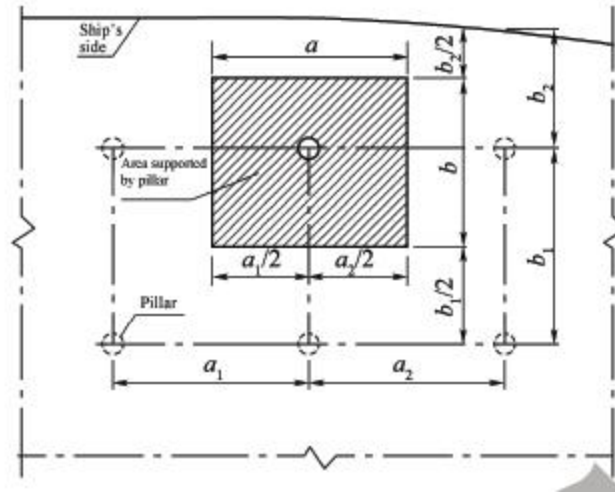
Schematic Diagram of Pillar-supported Deck Area
